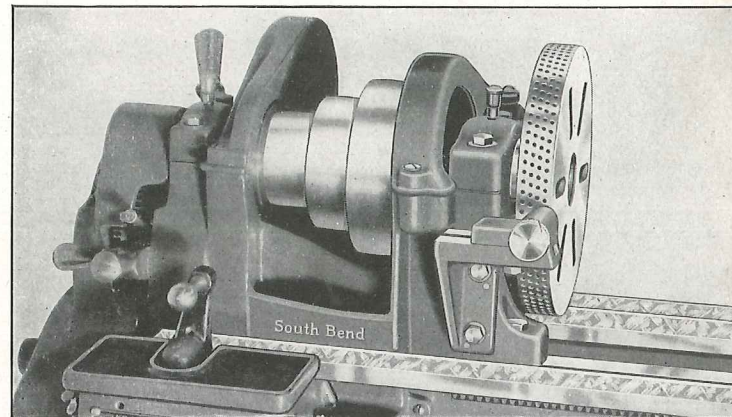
The Indexing Face Plate Mounted on Headstock Spindle of Lathe
